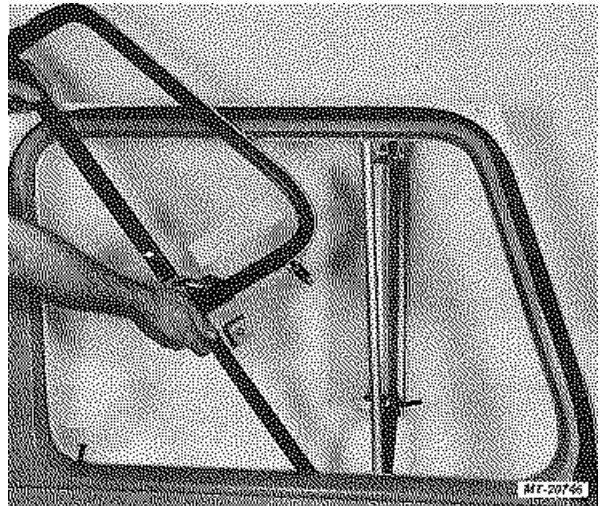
Removing or Installing Door Vent Glass and Front Run Channel
